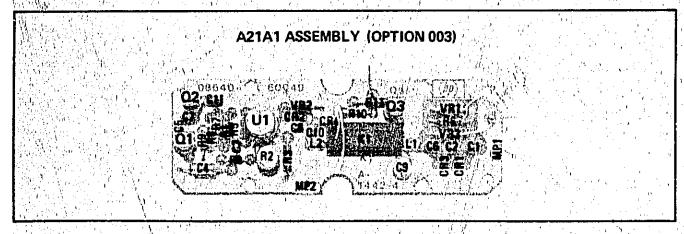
A21A1 Reverse Power Protection Board Assembly (Option 003) Component Locations
